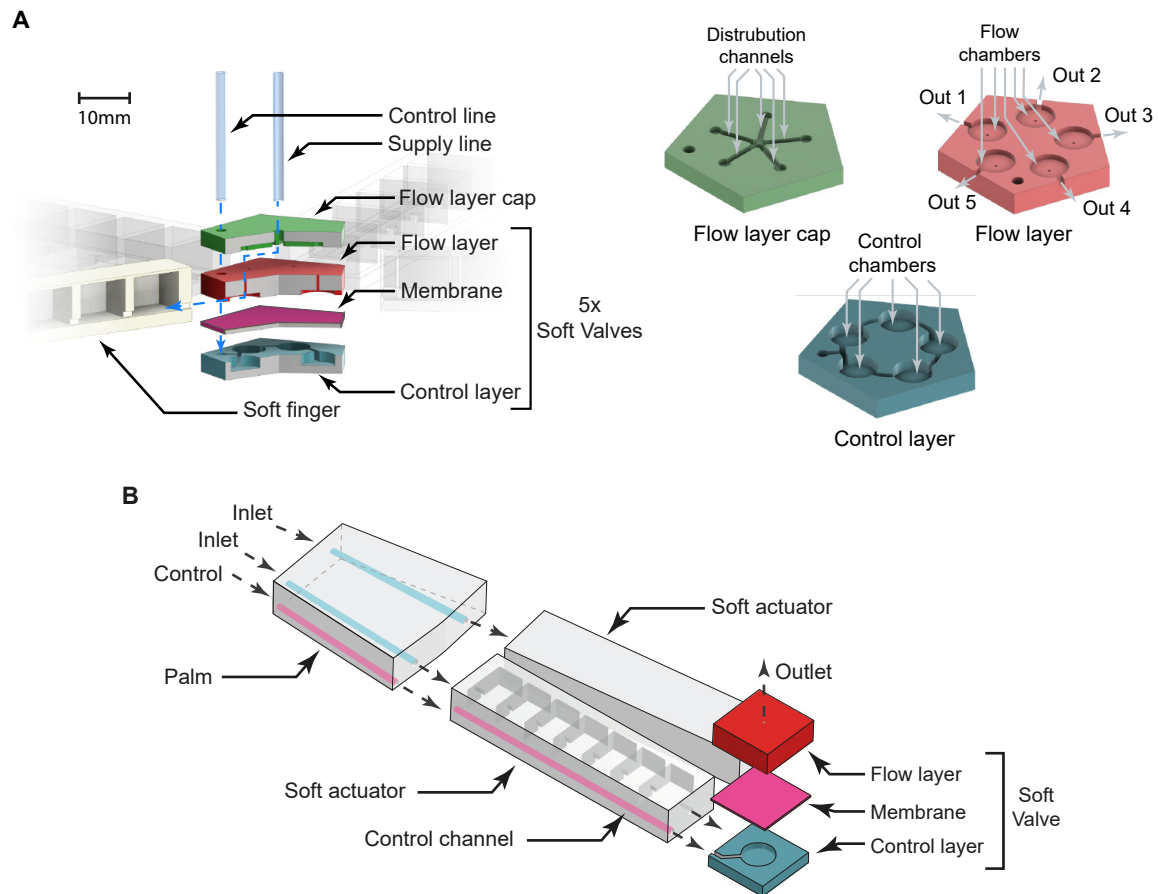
Manufacturing of the soft grippers. (A) Structure of the five-finger soft gripper and detailed view of the layers constituting the palm embedding the soft valves. (B) Detailed view of the assembled two-finger hand.
